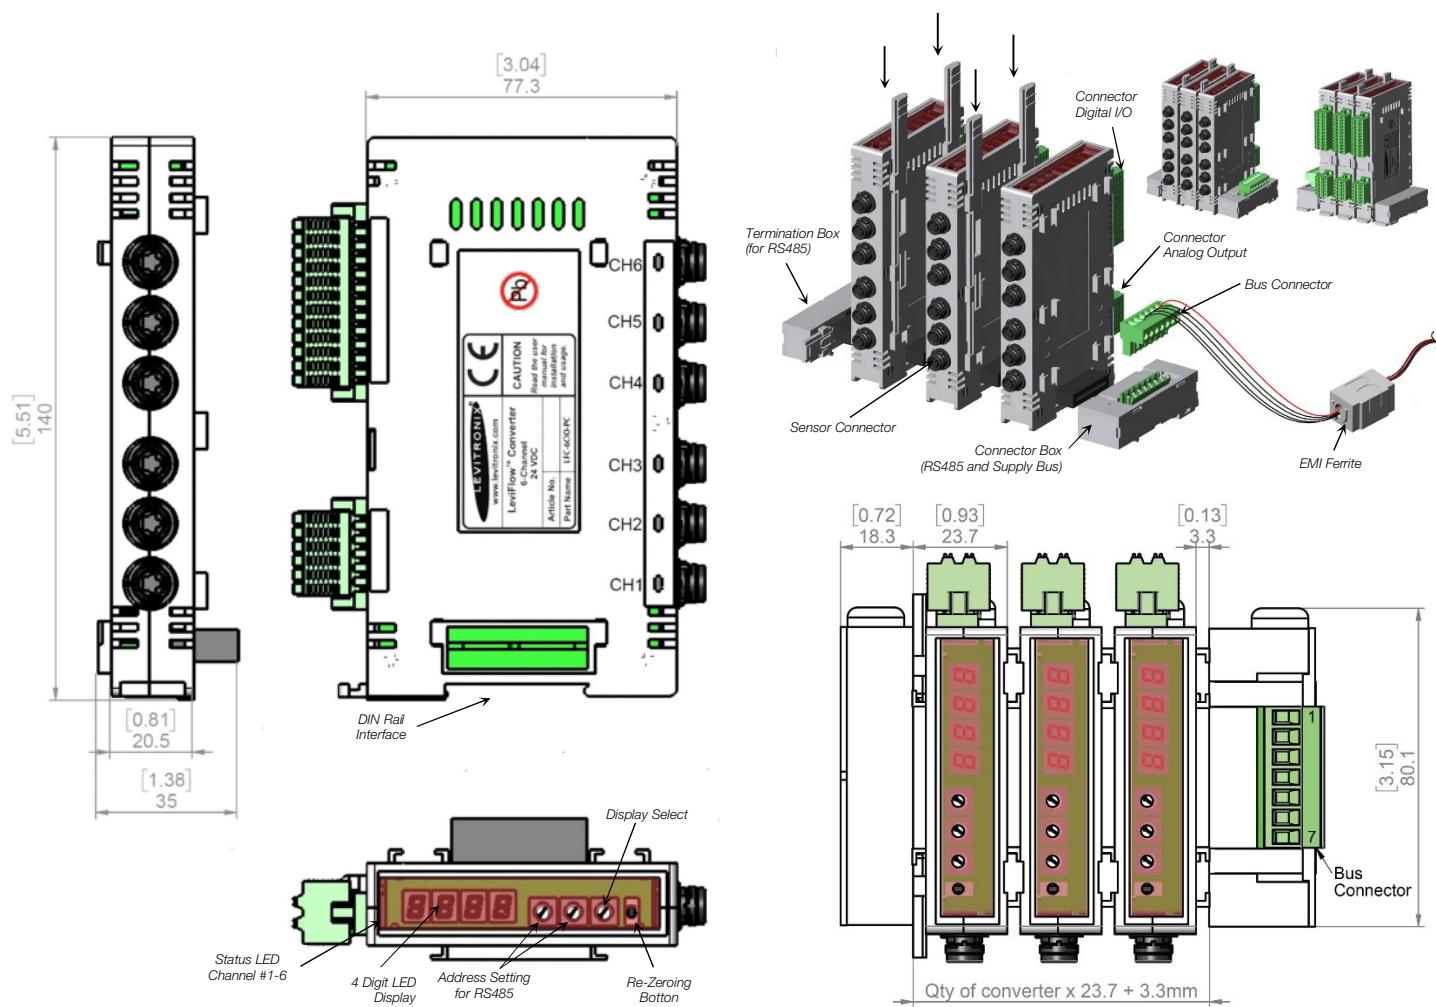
Dimensions, mounting and stacking concept of converter LFC-6CIO-PC
